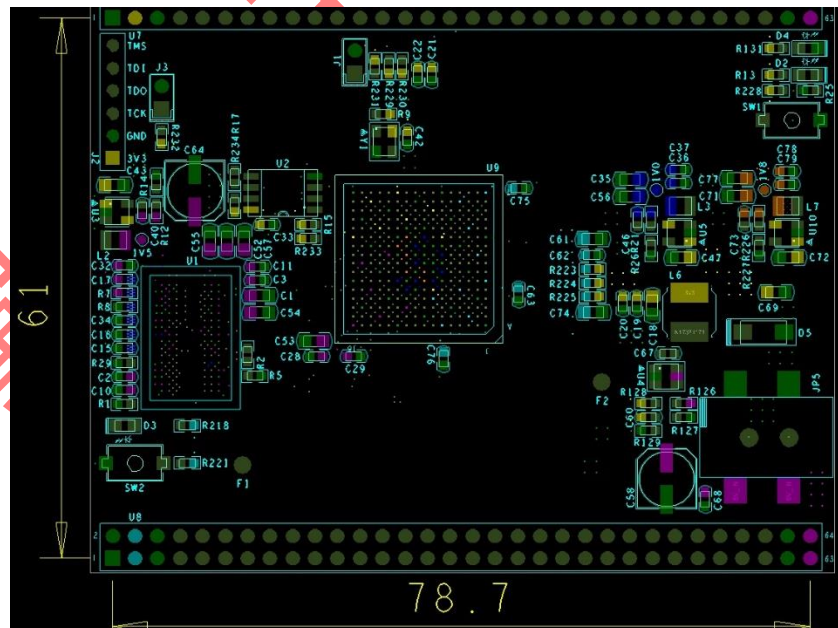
QM_XC7A35T_DDR3 Core Board Dimension
